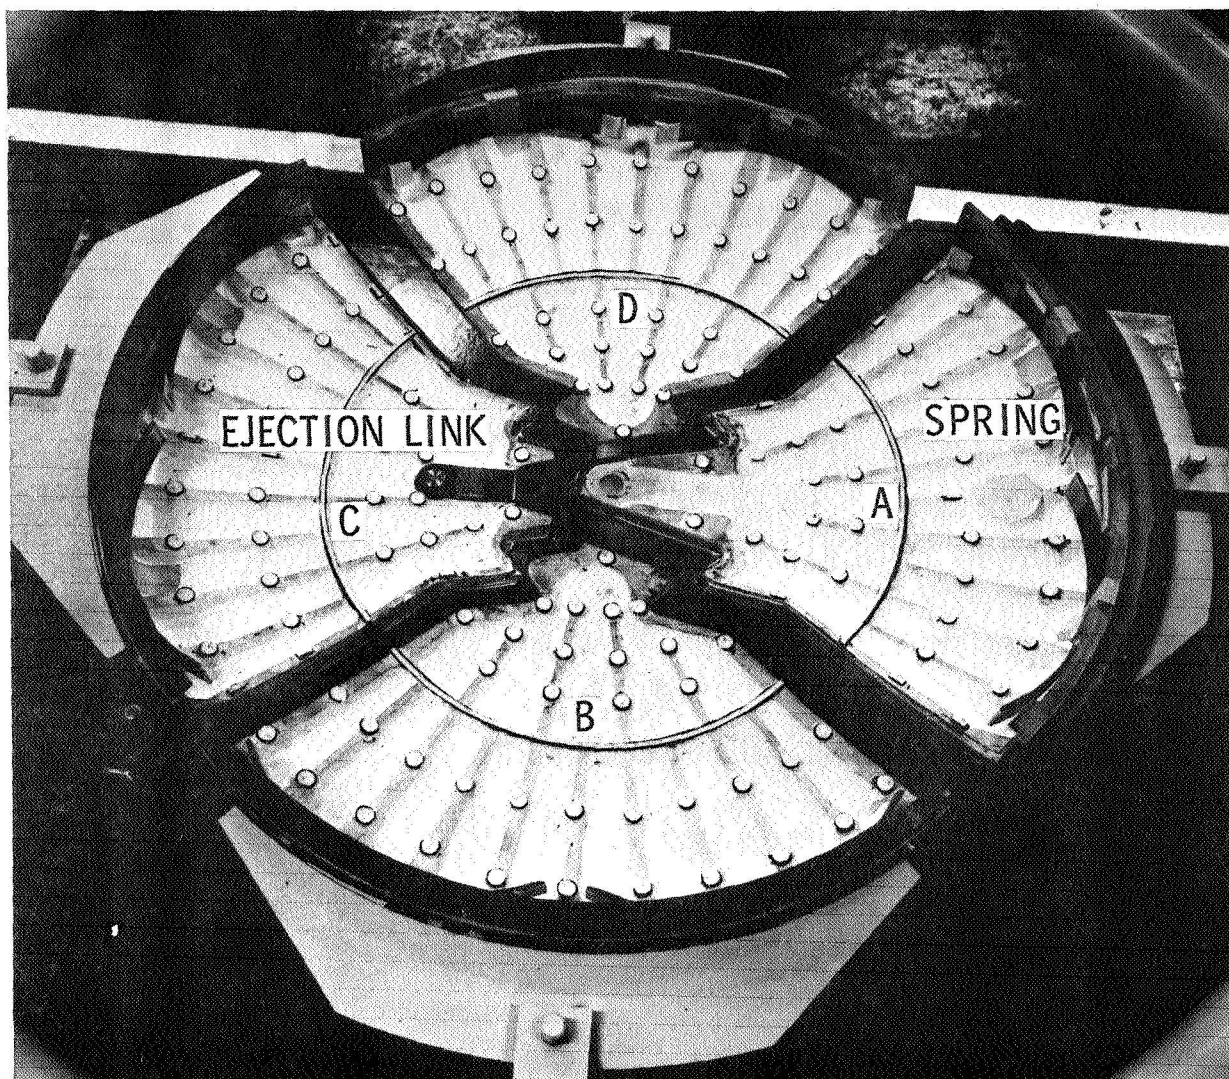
Phenolic-asbestos heat-shield quadrants in assembly test fixture.
